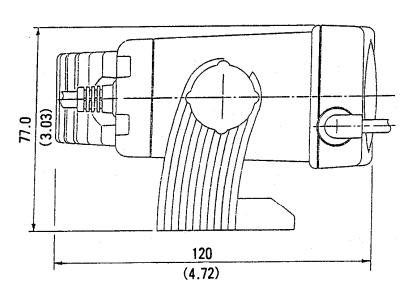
OUTLINE AND MOUNTING DIMENSIONS
